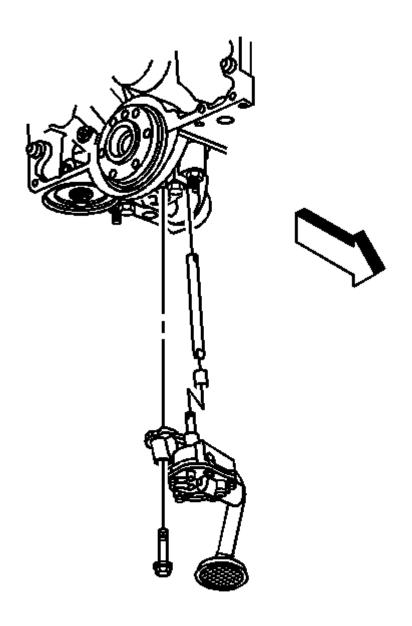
View Of Oil Pump, Bolt, Retainer & Driveshaft Courtesy of GENERAL MOTORS CORP.
